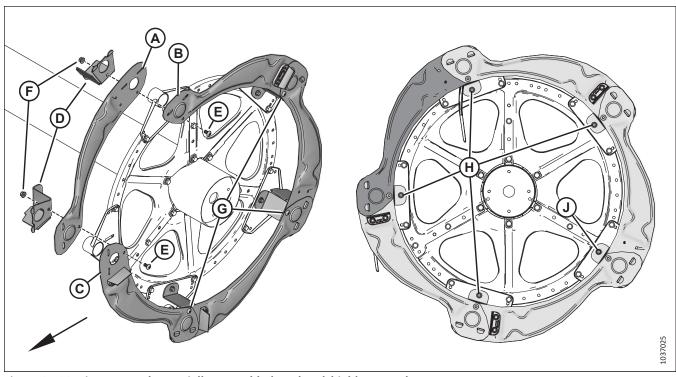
Five-Bat Reel - Partially Assembled Reel Endshields on Reel
